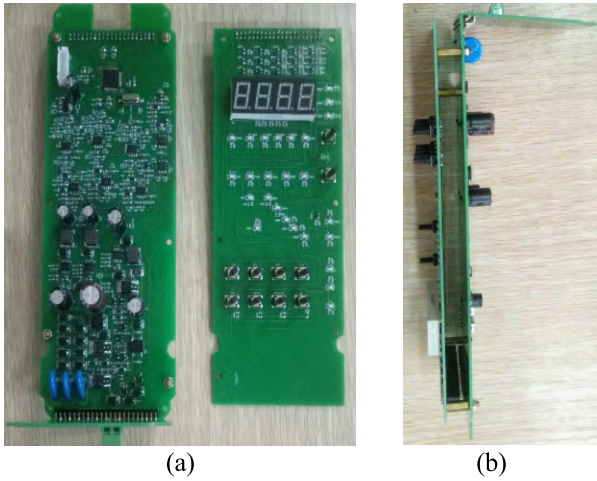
Physical drawing of intelligent release prototype. (a) Top view of the prototype. (b) Side view of the prototype.
